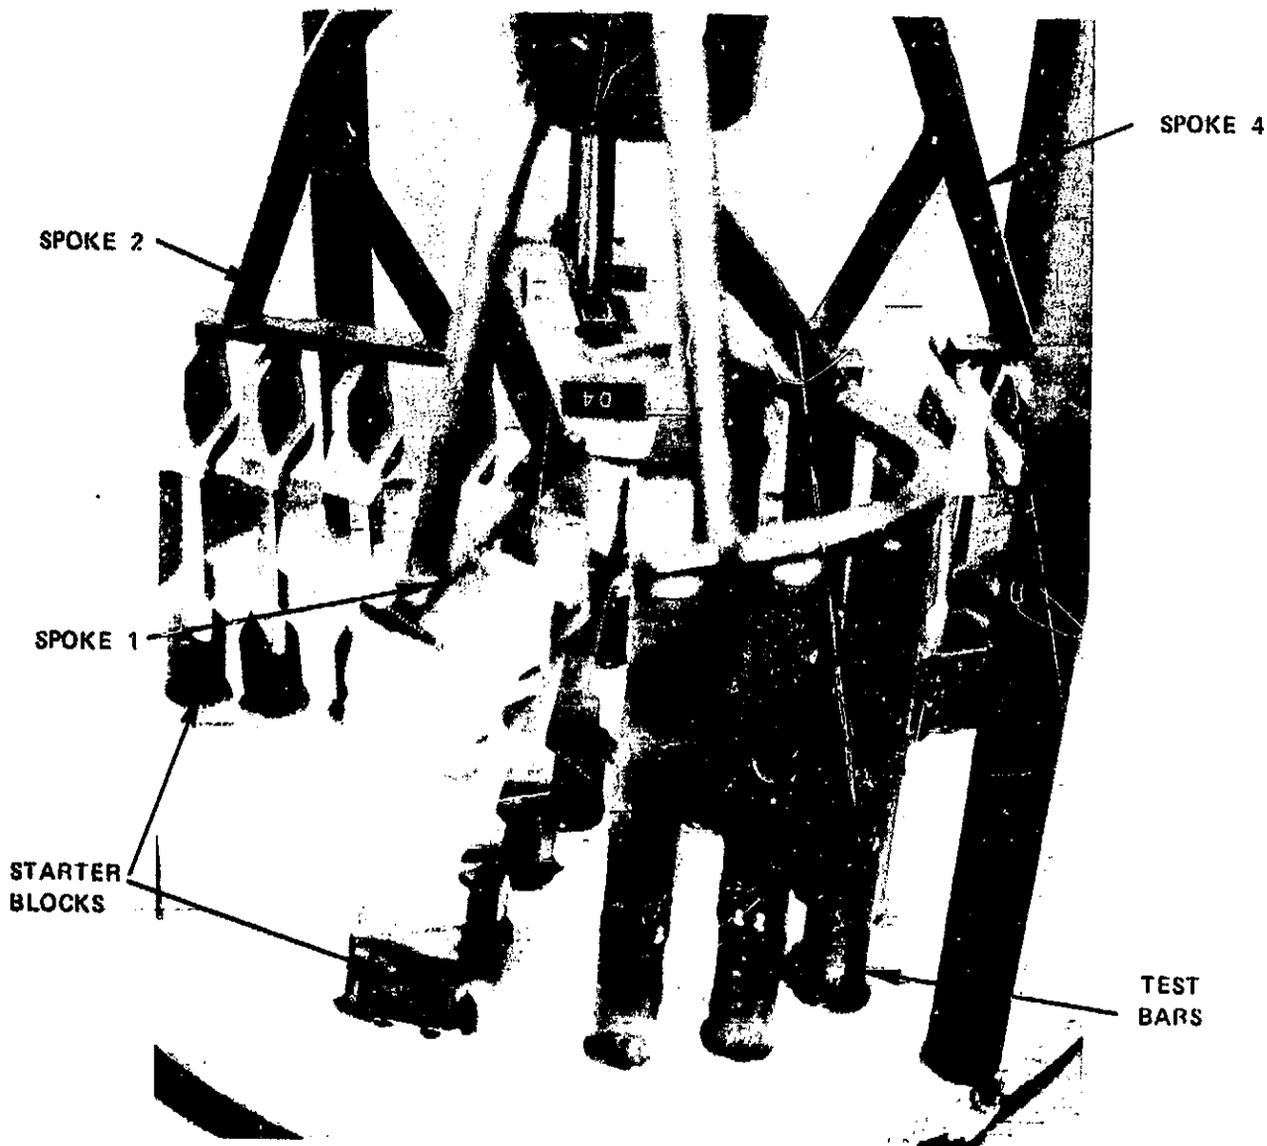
Task I, Mold 13 Wax Assembly for the Preliminary Design of the Uncooled TFE731-3 Blade in the Root-Up Position.
